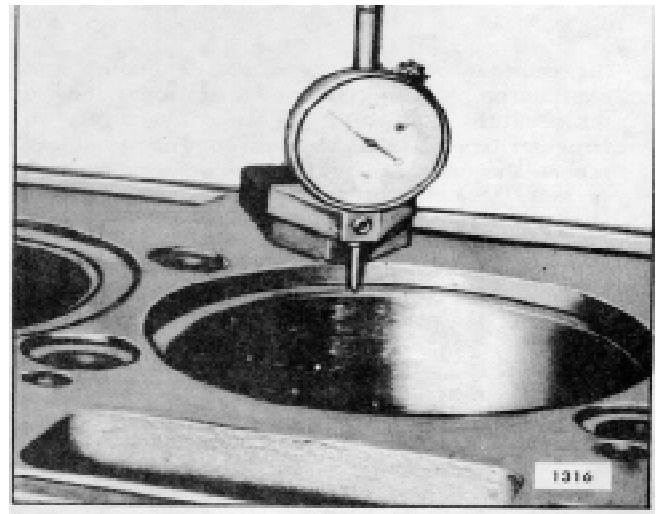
Checking Depth of Counterbore for Cylinder Liner with Tool J 22273
